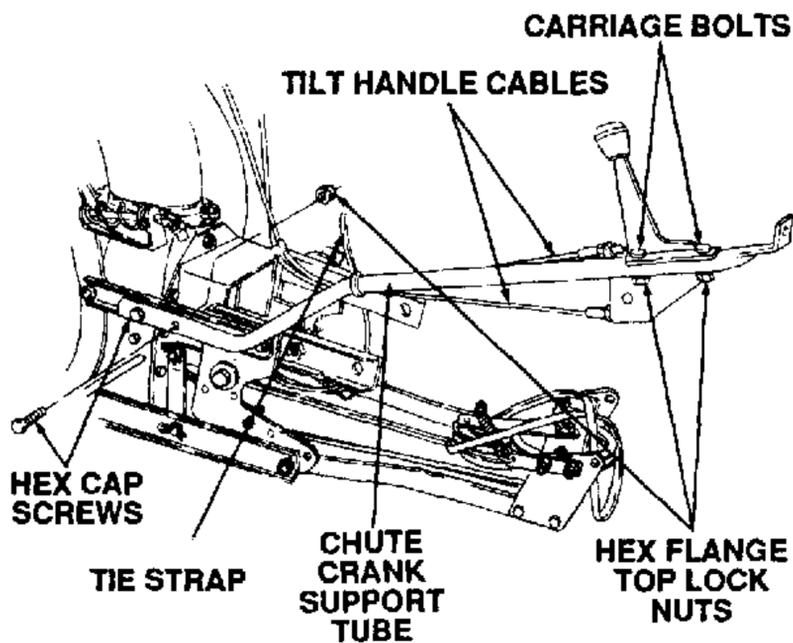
Installing Chute Crank Support Tube and Tilt Handle.
